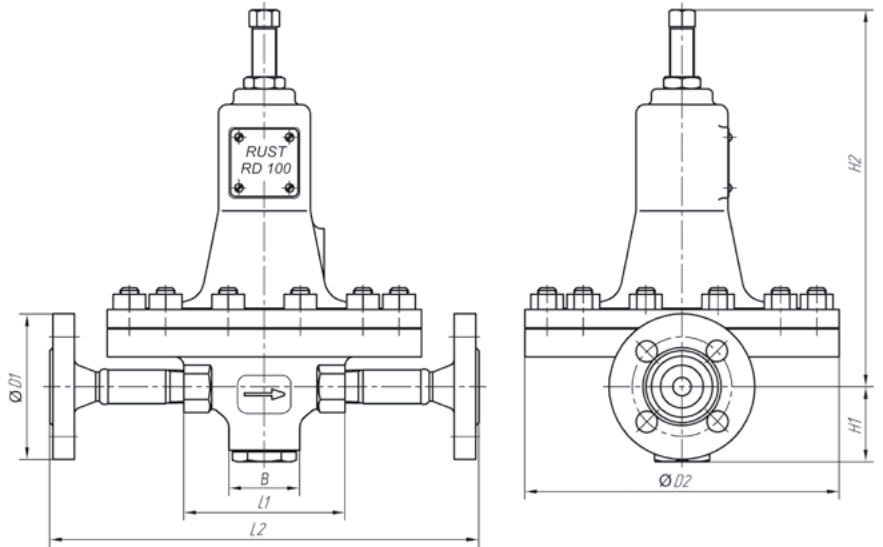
Overall dimensions of RD 100 series flanged design pressure control valve
